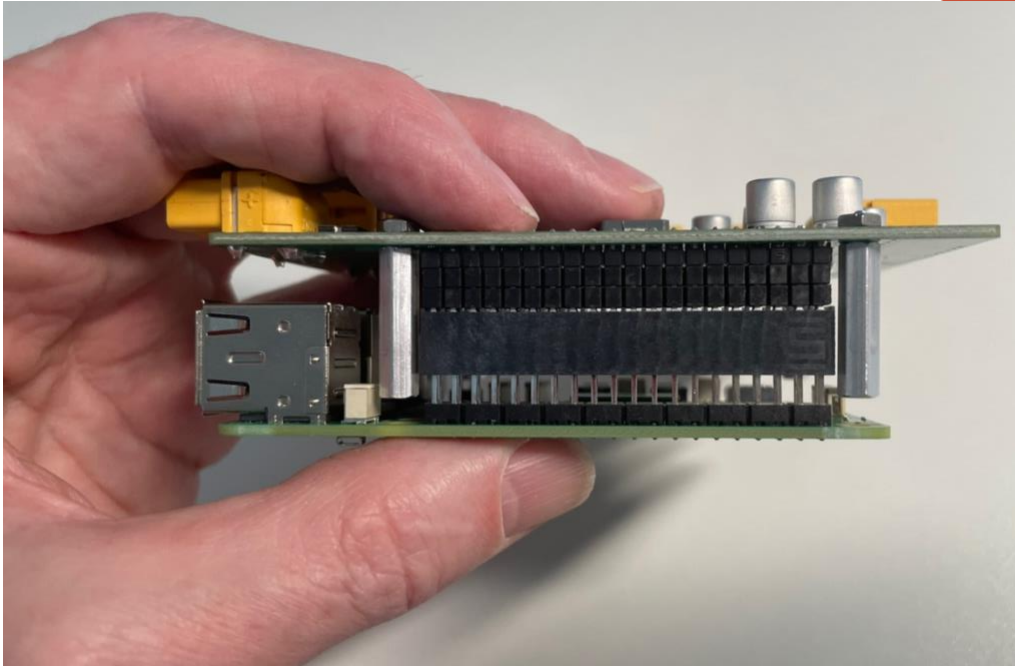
Align the 40 pin GPIO socket on the Raspberry Pi 5 with the black 40pin GPIO extension socket on the power board and gently push the two together.
